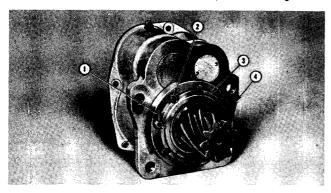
BEARING RETAINER 1. Roll Pin 2. Capscrew 3. Retainer 4. Case
